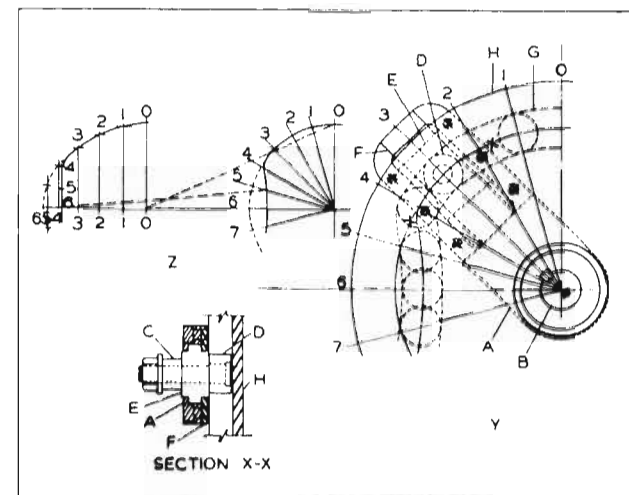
Rotating crank and cam mechanism produces dwell in reciprocating movement.
